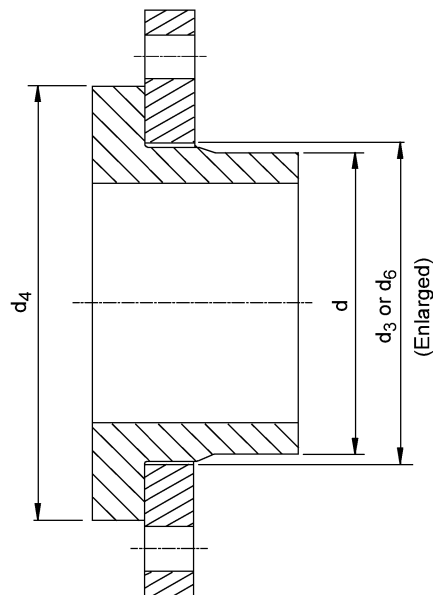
Improving the load-bearing capacity by adjusting the dimensions of the loose flange and the welding neck.
